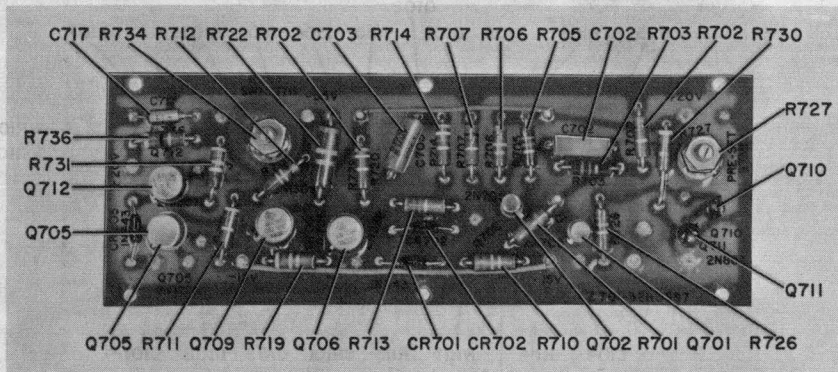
Sweep Generator, Printed Circuit Board Z701
